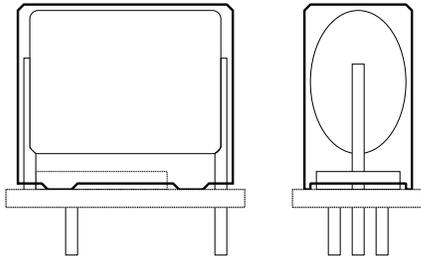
Example fixture used to position the winding flush with the bottom of the capacitor casing for repeatable alignment and joining with the capacitor.
